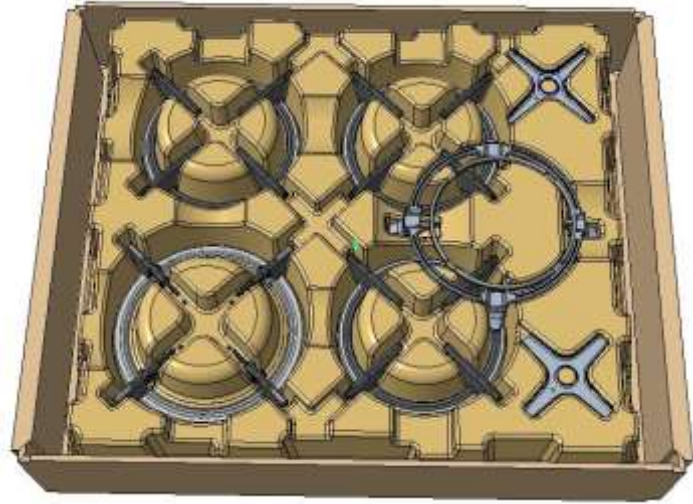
Cross-section-3 view of grill and top molded part.
